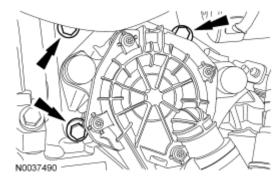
Locating AIR Pump Bolts Courtesy of FORD MOTOR CO.
